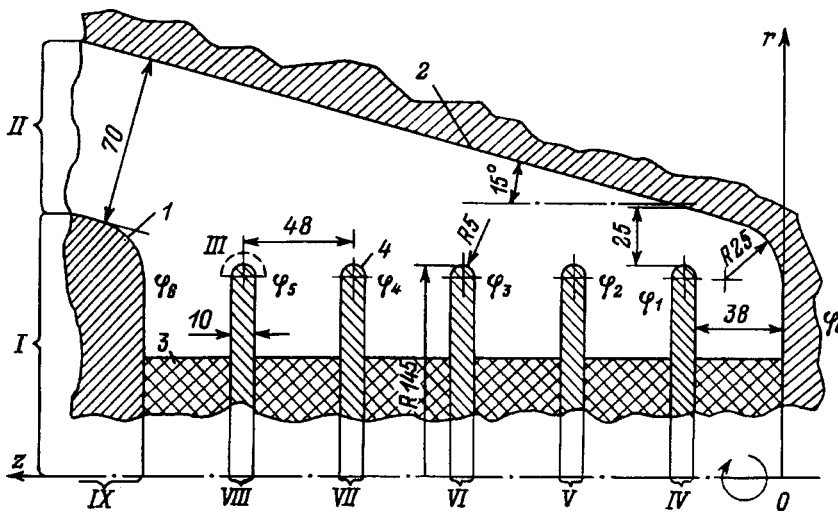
Axial cross section of the first design region: 1 — shield I; 2 — shield 2; 3 — insulator ring; 4 — gradient ring.
